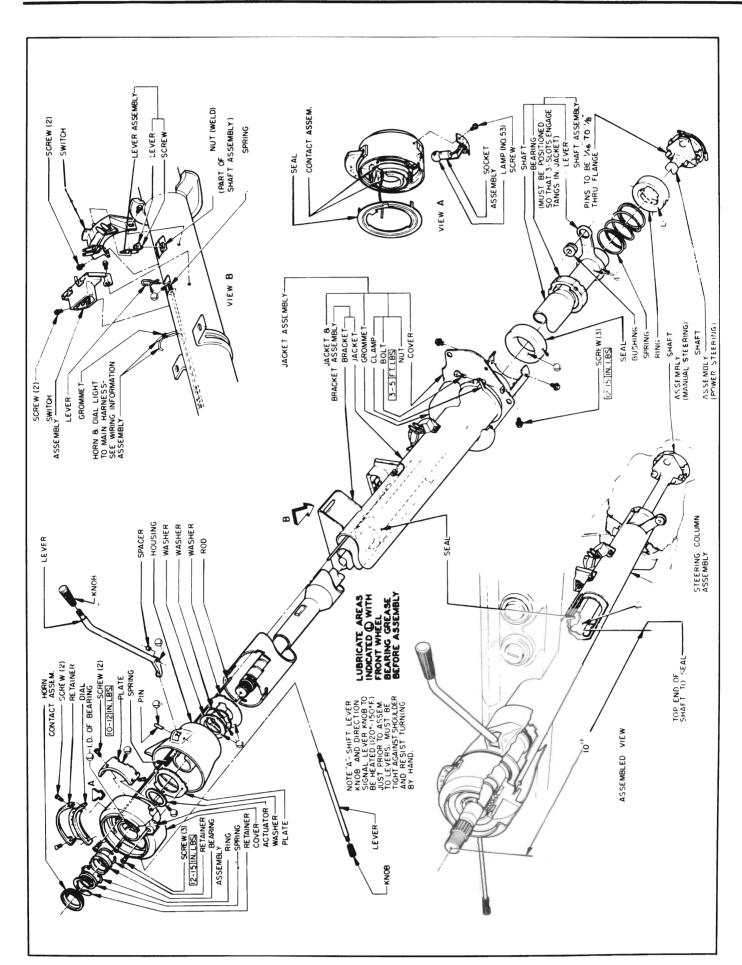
Mast Jacket and Transmission Shaft Assembly - Automatic Transmission
